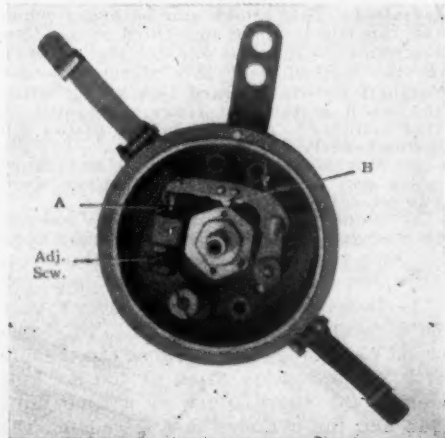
Remy ignition distributor used on Paige, Brooklands model 51
